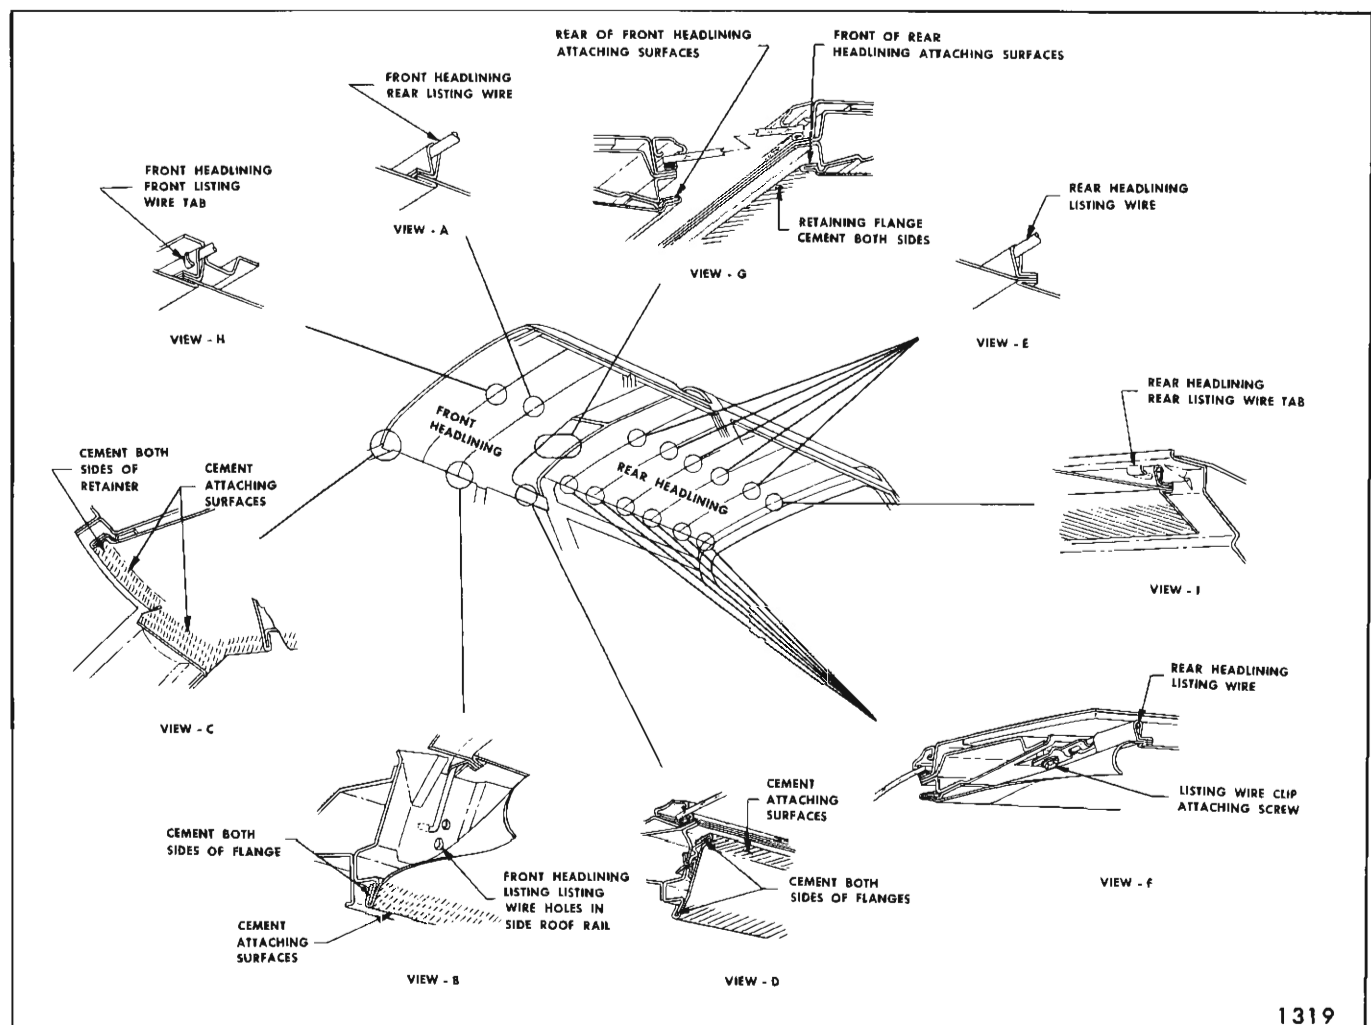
G4—Headlining Installation - "55" and "65" Styles
